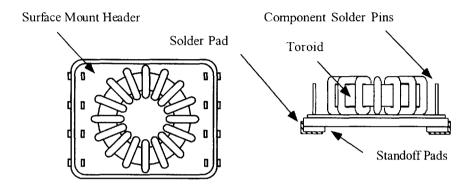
"J" Type Lead Surface Mount Carrier (SMC).
